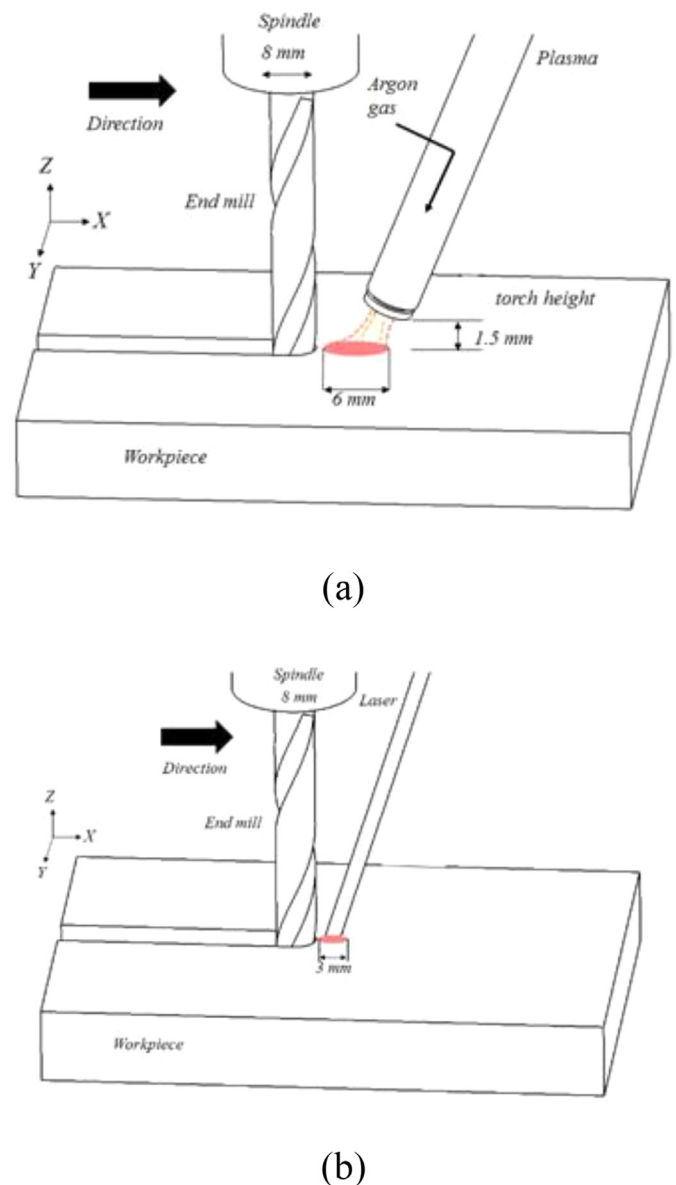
Main component of the (a) PAM and (b) LAMill system.
